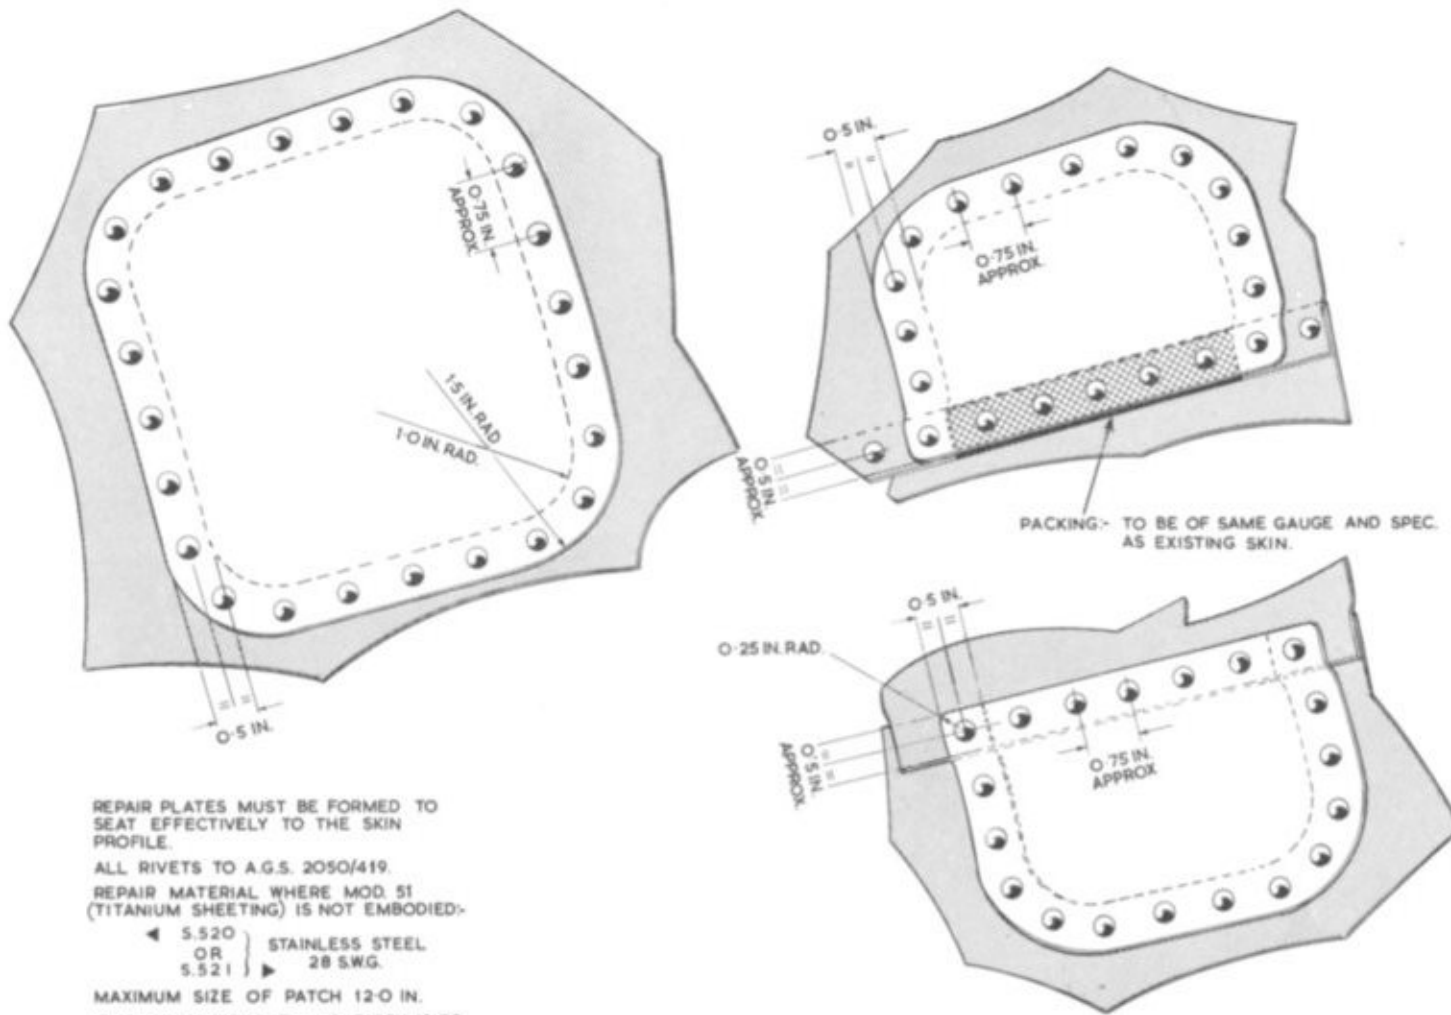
Jet pipe tunnel and fireproofing repairs.
